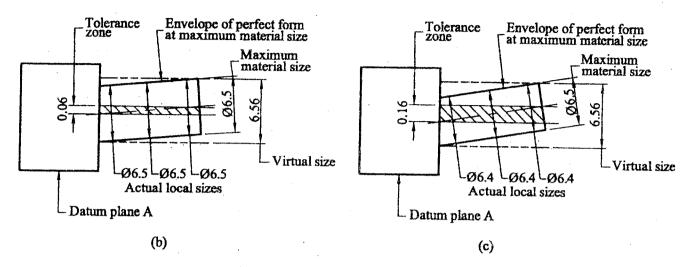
Extreme cases of parallelism tolerance of a shaft
